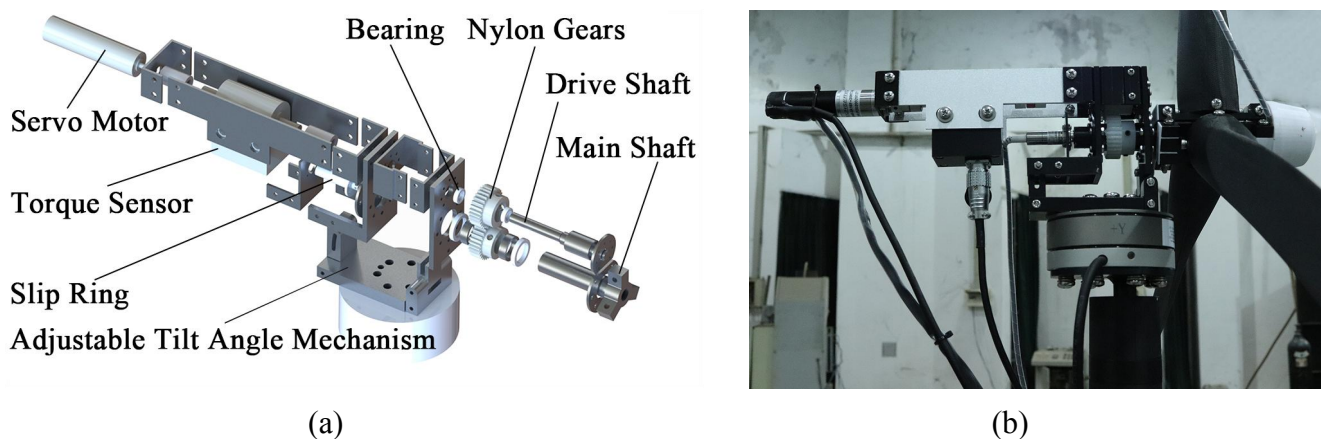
The nacelle (a) An exploded view. (b) The physical structure.
